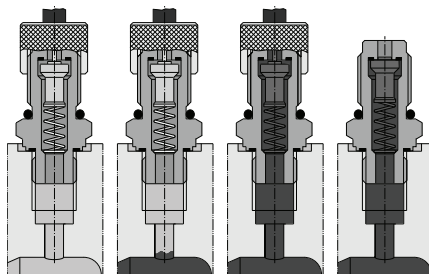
Filling and bleeding hydraulic cylinders with threaded coupling
